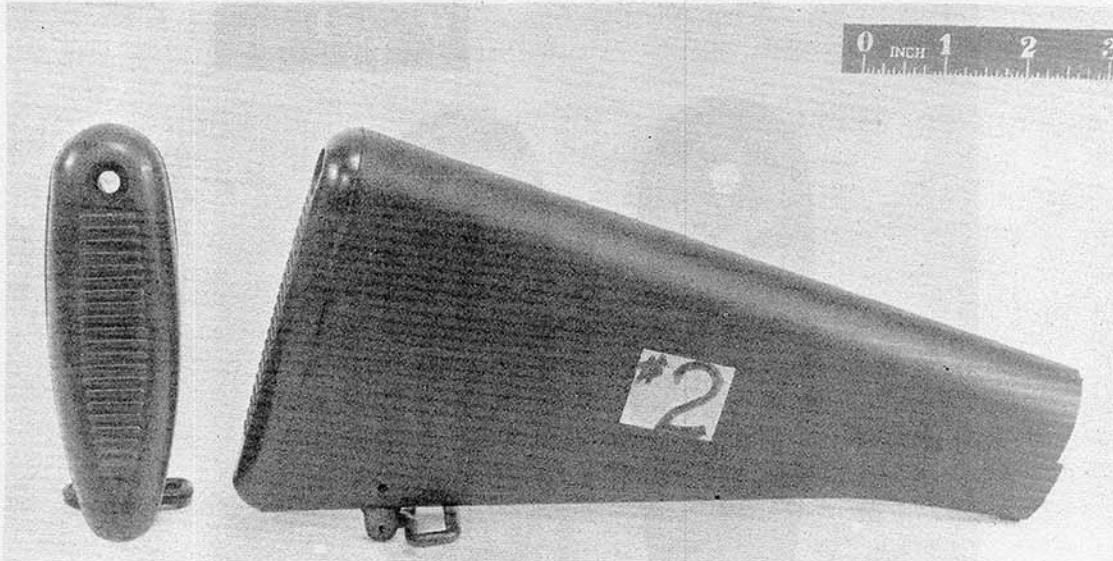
Rear and Side Views of a Standard (Control) Buttstock.
